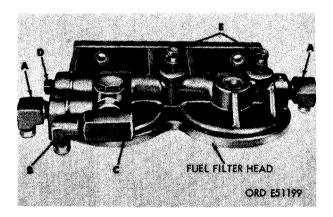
REMOVING OR INSTALLING FUEL FILTER ELBOWS, TEE, AND VENT VALVES.
